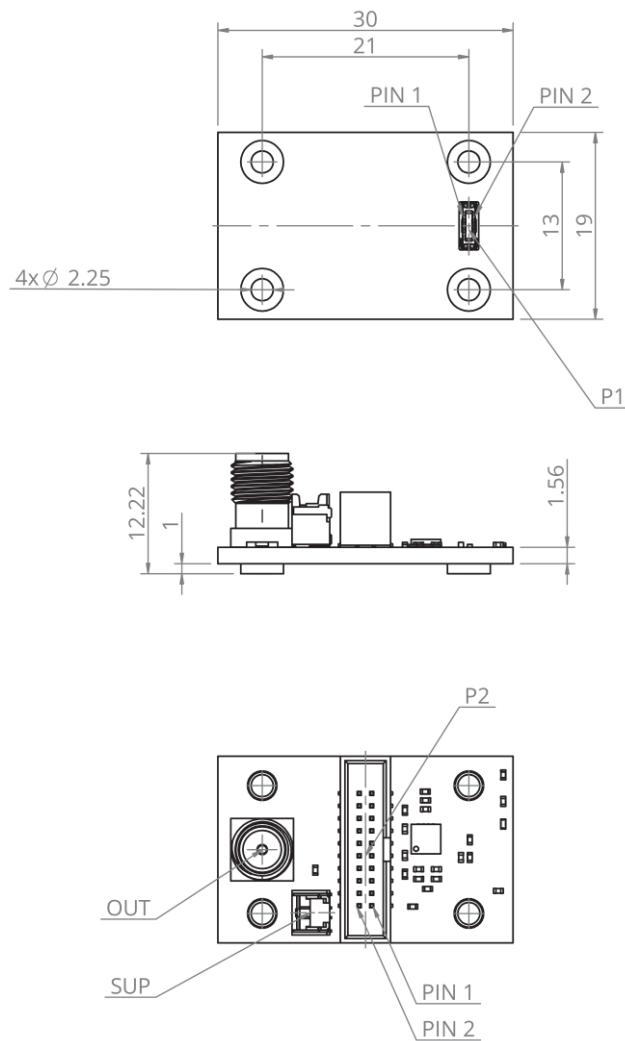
Dimensions of the AMS-x1-SMA (given in mm)
